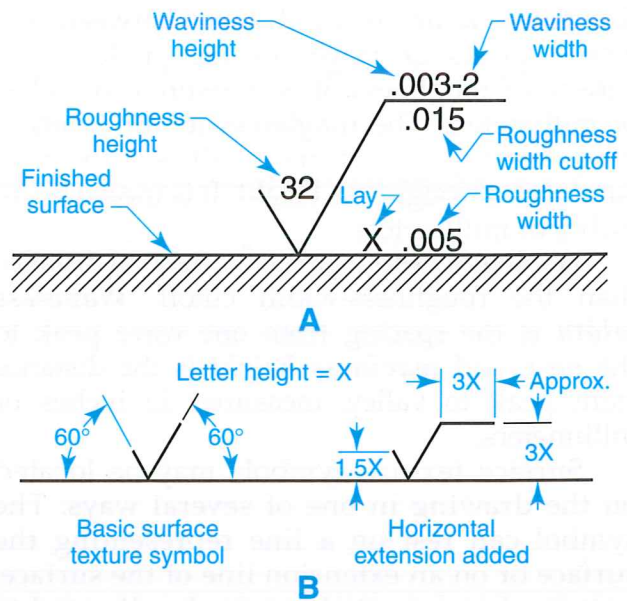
Drawing conventions for surface texture symbols. A—Values at specific locations on the symbol designate the surface finish. B—Dimensions for drawing surface texture symbols.
